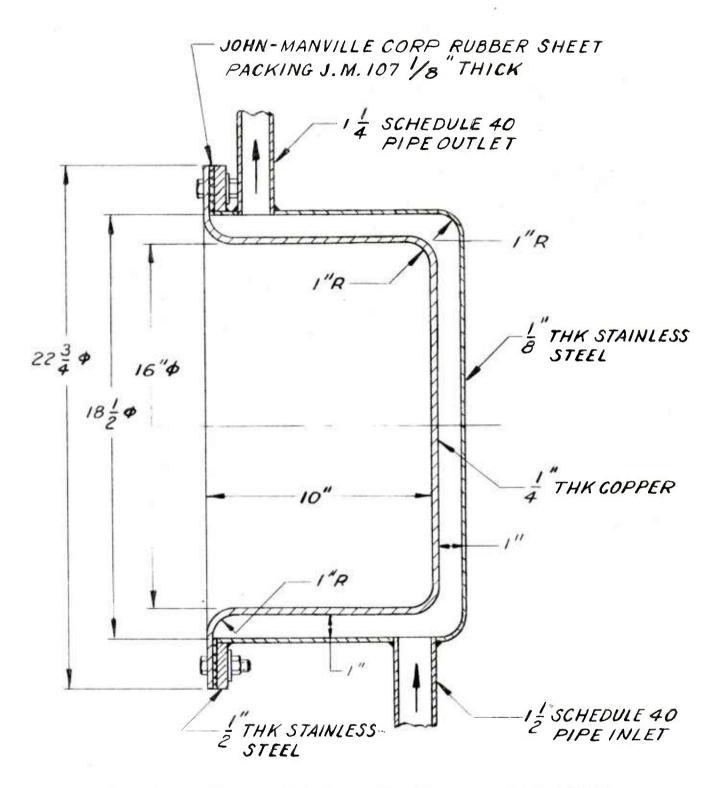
DESIGN DRAWING OF THE 16 INCH DIAMETER,
